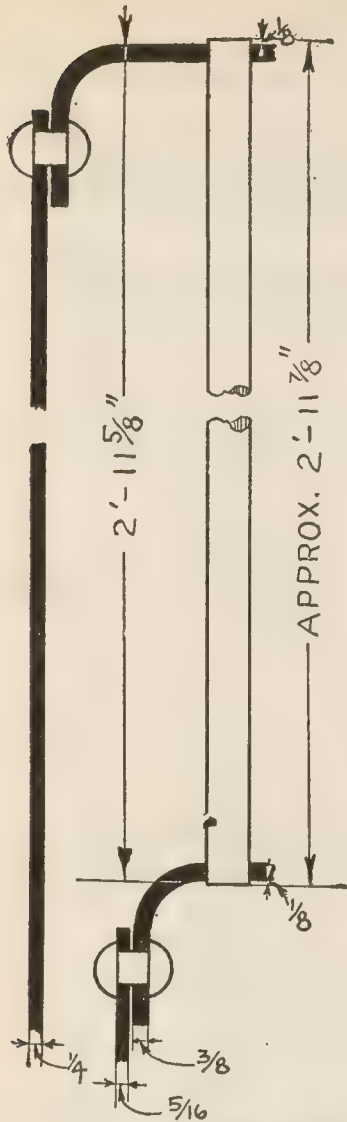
,741.—Detail of tube and sheets showing allowance for cutting and tube margin outside of sheets for beading.
